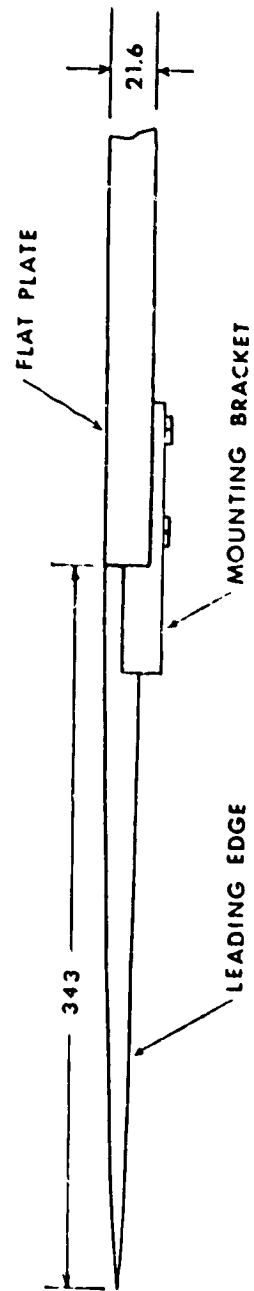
Leading edge-flat plate junction. All dimensions in millimeters.
